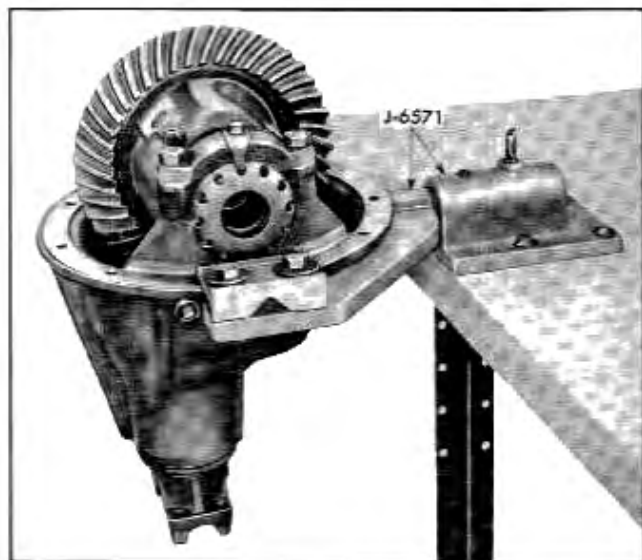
Differential Mounted in Carrier Fixture J-6571
